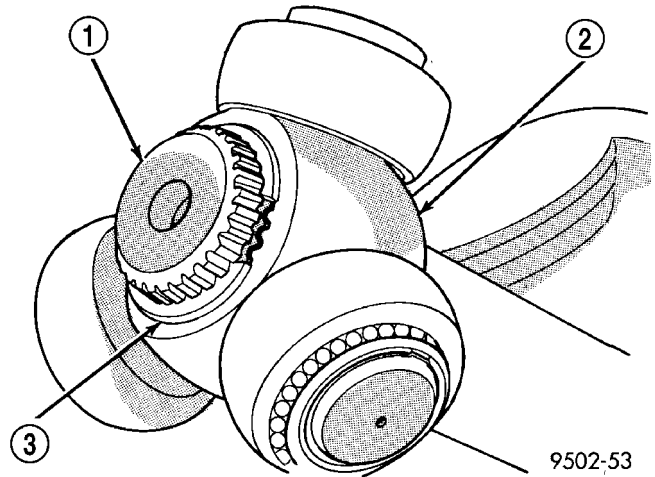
Spider Assembly Retaining Snap Ring Installed
